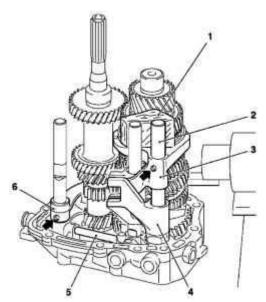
Removing the components of the switching mechanism of 5-th transmission: 1 - wooden block, 2 - shaft gear-changing, 3 - plug switch 3 / 4 gears, 4 - switching mechanism 5-th transmission, 5 - splint, 6 - fork include reverse gears
